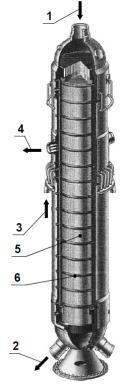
Once-through straight-tube SG in the Oconee NPP: (1) primary inlet; (2) primary outlet; (3) feedwater inlet; (4) steam outlet; (5) heat-exchange tubes; (6) spacer grids
